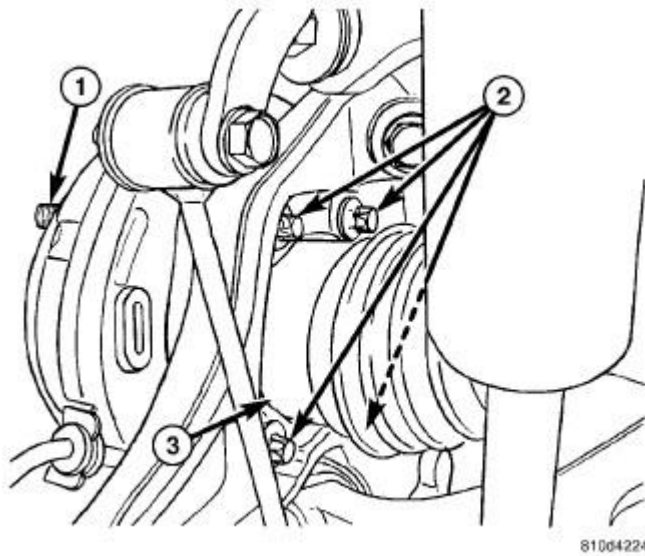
Hub & Bearing, Mounting Bolts & Half Shaft
